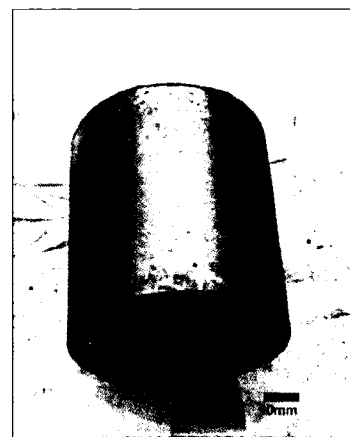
Uranium ingot fabricated with the ingot casting equipment.
